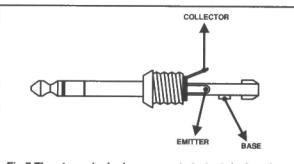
The stereo jack plug connects to test devices in the manner shown here.
